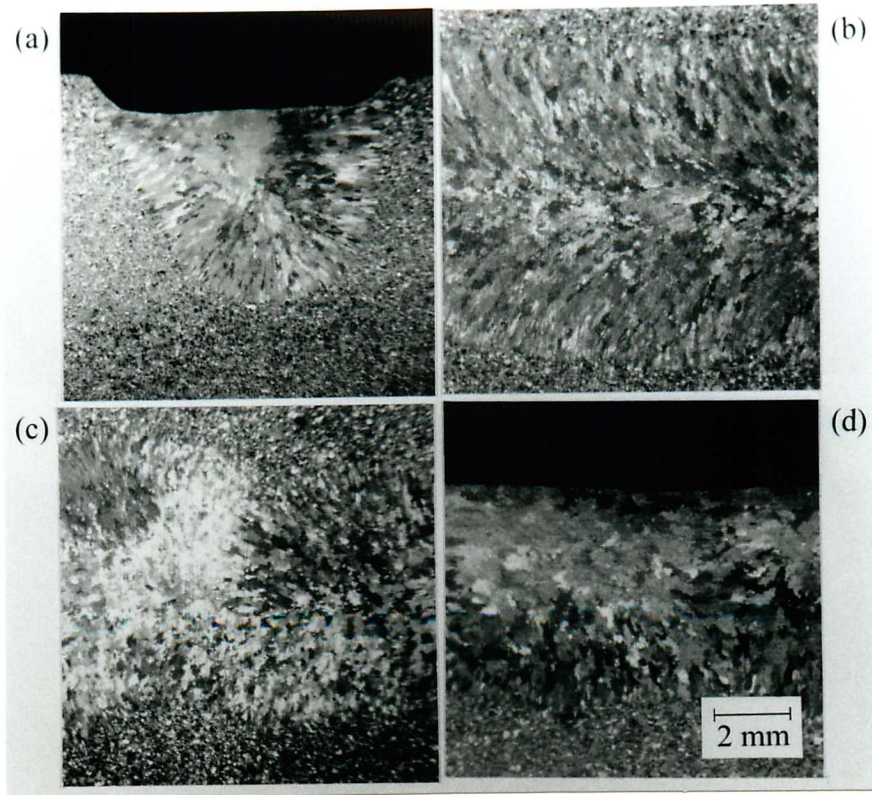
As-welded surface of the Si_3N_4 inoculated deposit.
